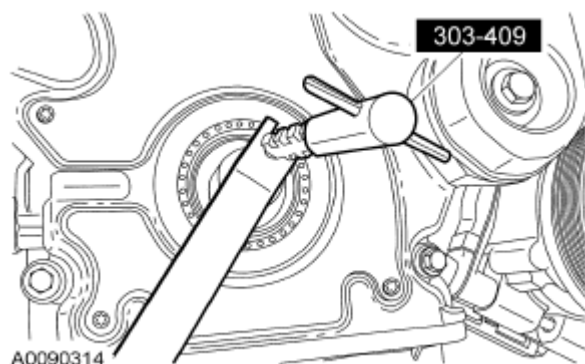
Removing Crankshaft Front Seal From Front Cover Using Special Tool (303-409)
